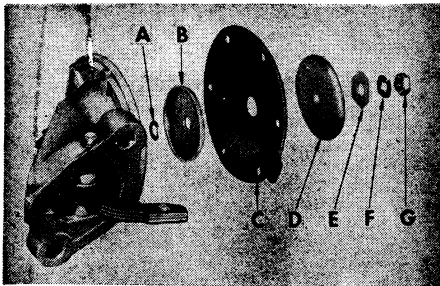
Series B. Assemble diaphragm parts in following sequence: A. Pull rod gasket. B. Lower diaphragm protector. C. Fabric diaphragm. D. Upper diaphragm protector. E. Diaphragm alignment washer (six-sided). F. Lock washer. G. Diaphragm nut.
